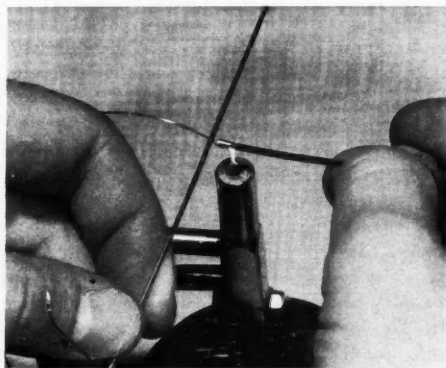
Soldering thin wire to thick. A piece of 1.25-mm. wire with solder on the end is heated in a fine flame and the molten solder touched onto the fine and thick wires which are clipped together; the solder will then flow onto the joint without overheating the fine wire.
